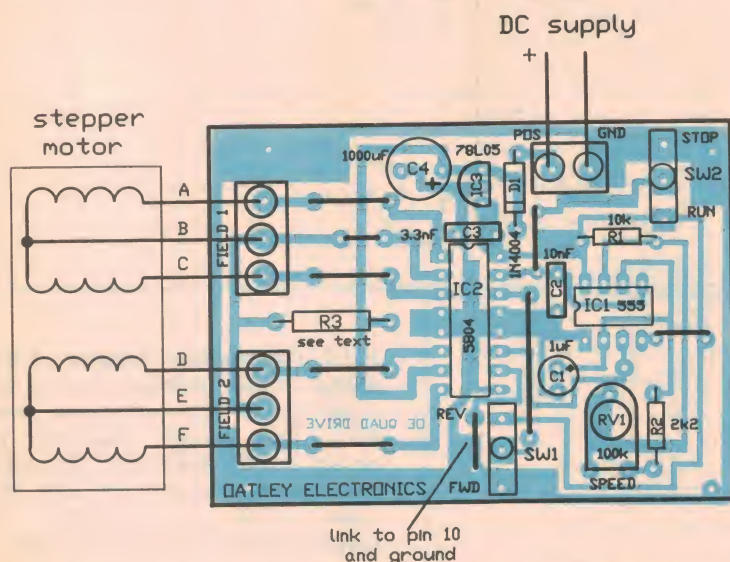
Here's the layout for the experimenter's 5804 stepper motor controller PCB.
